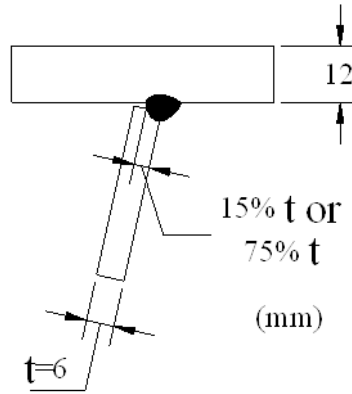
Weld penetration ratio of specimens, D12R6P15 and D12R6P75.
